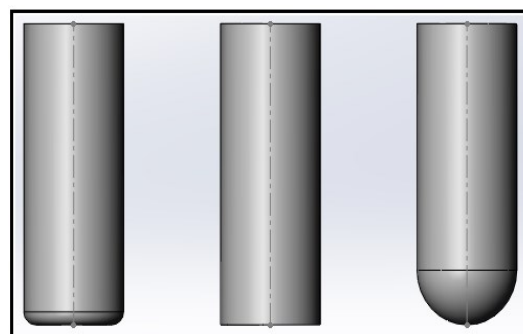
Torus end, flat end and ball end mill cutter respectively.
